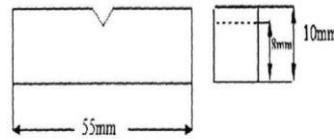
Charpy Testing Machine Figure 9: ISO Standard
